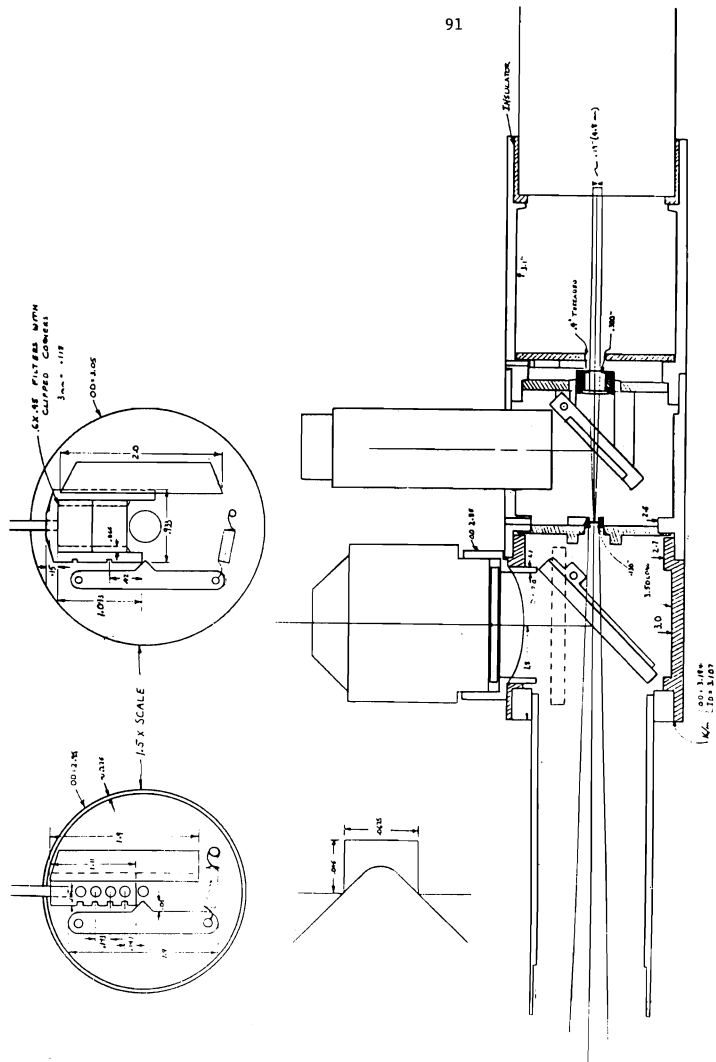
Mechanical layout of the photometer head with detail drawings of aperture and filter slides.
